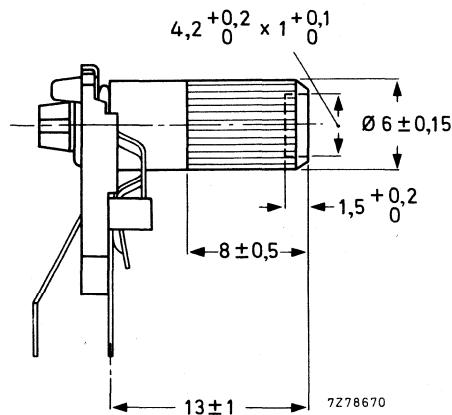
Test switch for vertical mounting with adjustment knob at the side of the selector contact.
